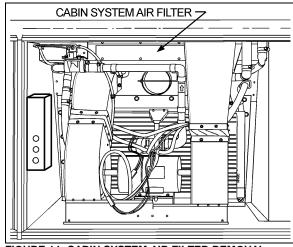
CABIN SYSTEM AIR FILTER REMOVAL22178E
